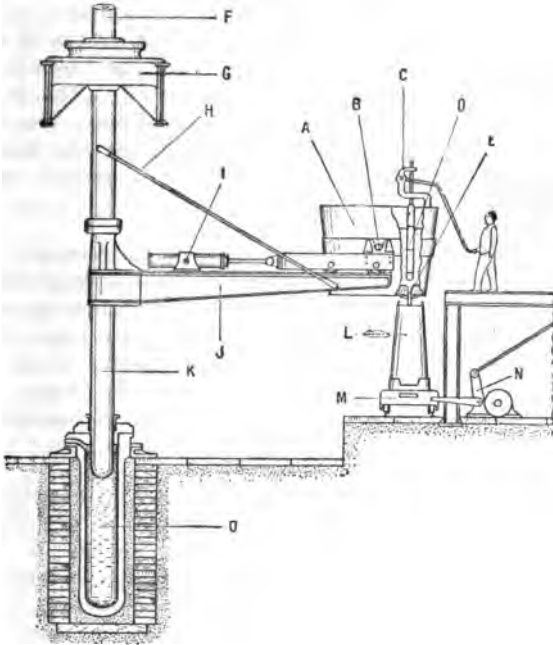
Teeming Bessemer Steel into Ingot Moulds.
